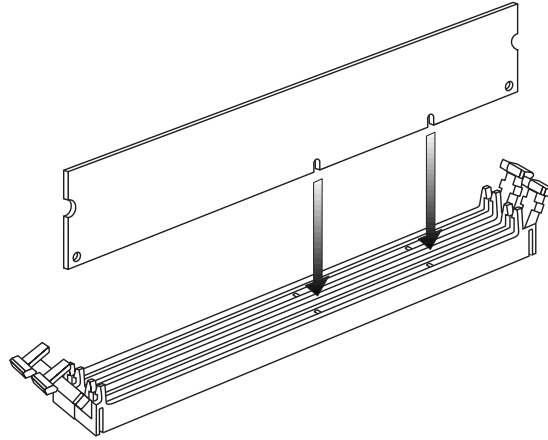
Insert DIMM module into connector with proper notch alignment
